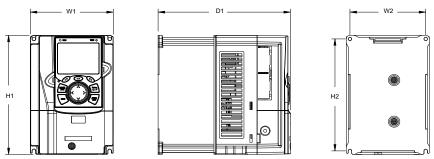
Wall-mounting diagram for 380V 1.5-37kW models
